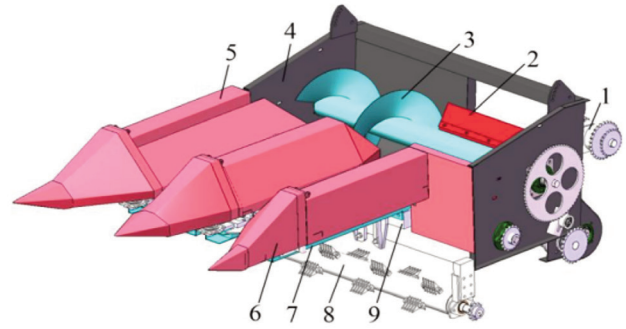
Cutting table 3D model. 1, Power input section; 2, toggle plate; 3, auger; 4, corn header frame; 5, shell casing; 6, grain divider; 7, spike rack; 8, chopping device; 9, gearbox.
